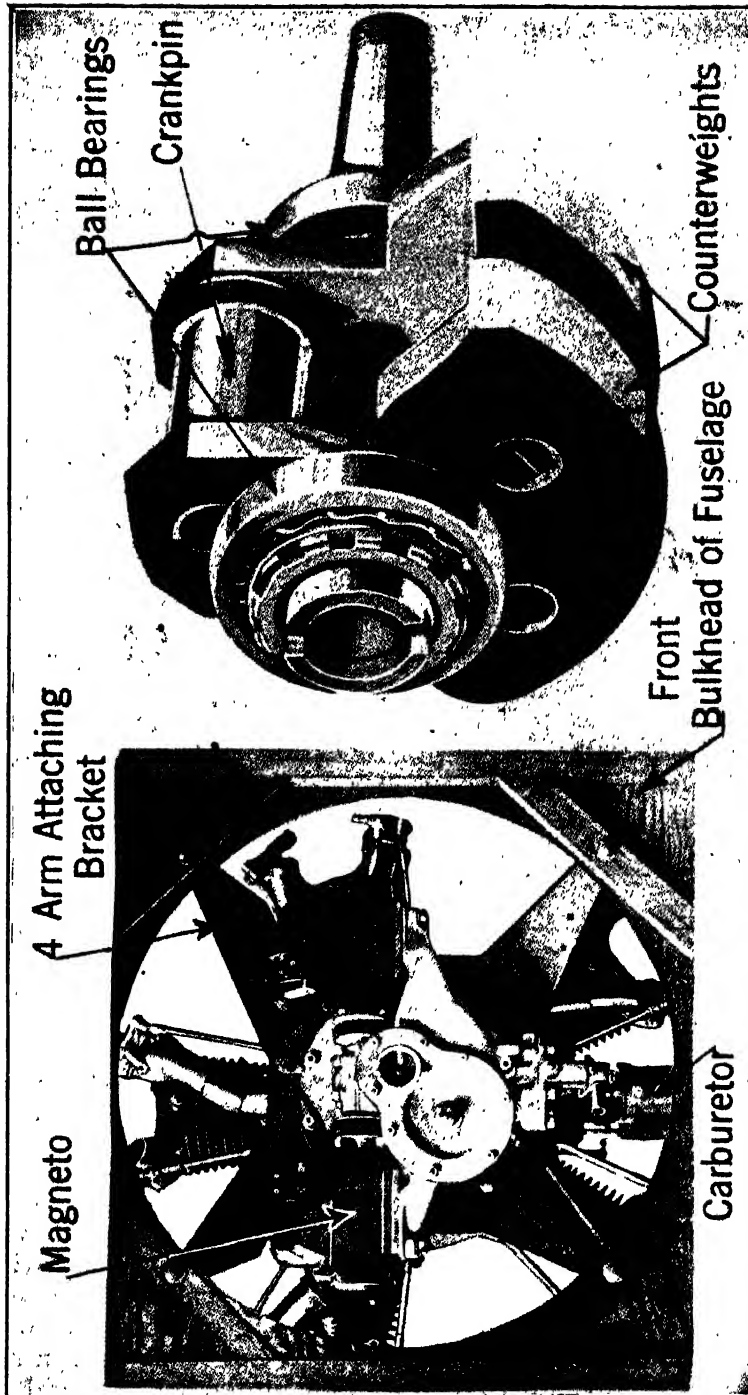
View at Left Shows Simple Installation of Detroit Aircraft Engine. The Counterweighted Crankshaft with Anti-friction Bearings is Shown at Right.
